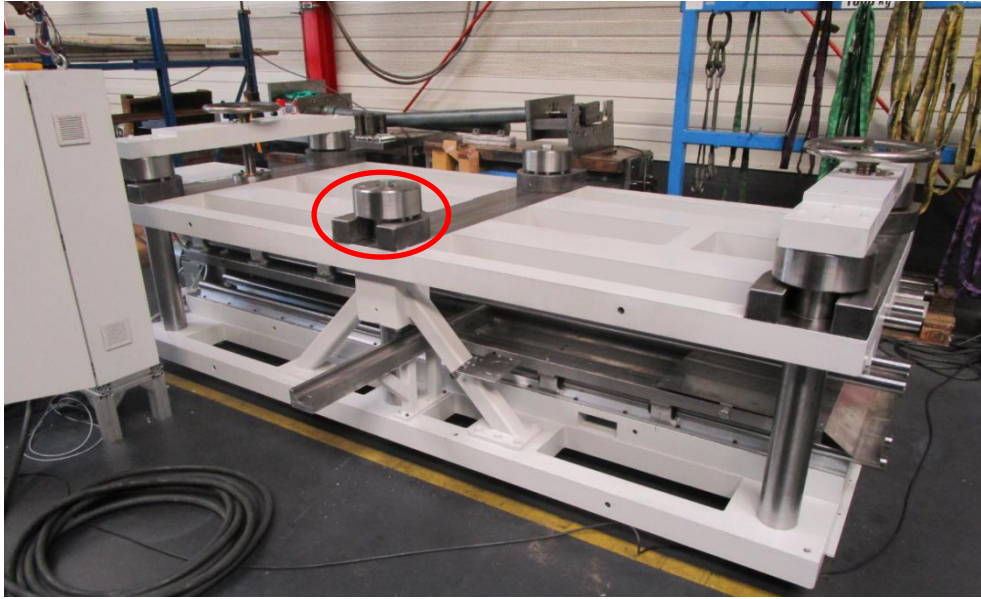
Final CWR machine with the spacer for realizing the correct roll gab
